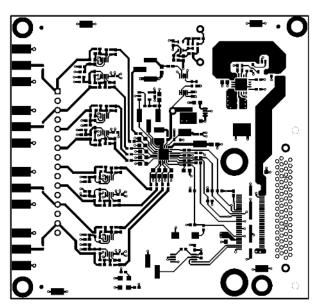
ADS8332EVMV2 PCB Layer 1: Top Layer
